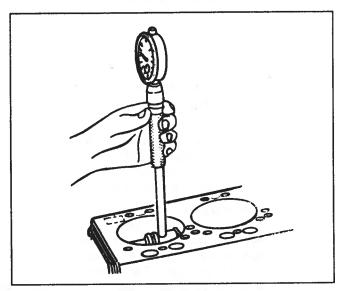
Using Telescoping Gauge To Check For Cylinder Taper And Out-Of-Round
